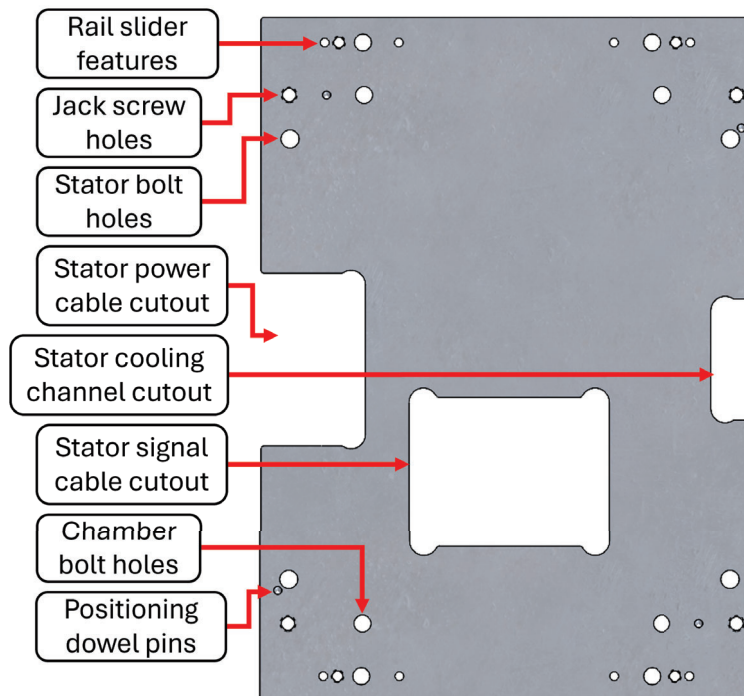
The module baseplate connects to both the machine chamber and the Planar Motors stator. The baseplate includes cutouts for the electrical and cooling channel connection on the stator. The baseplate also includes threaded holes which can be used to push the machine chamber if needed to separate it from a stator after sealing them together.
